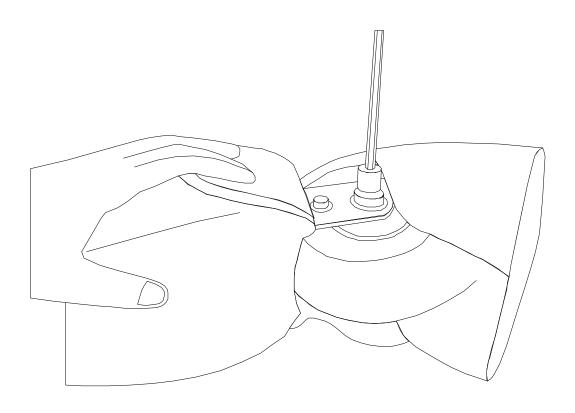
INSPECTION OF KNEE POST ASSEMBLY
